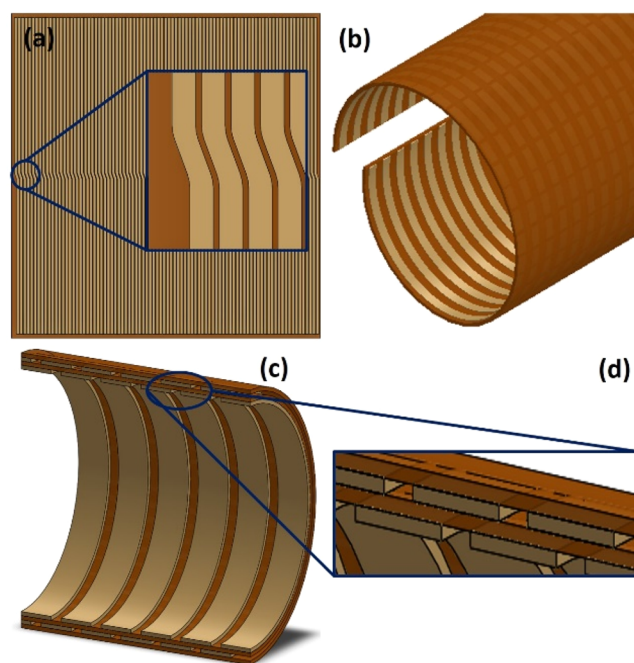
(a) CAD illustration of the flexible drift tube prior to rolling; the inset magnifies the “dog-leg” arrangement. (b) Coiling process. (c) Section view of the finished drift tube showing the drift and shielding electrode arrangement. (d) Magnified view of the overlapping arrangement.
